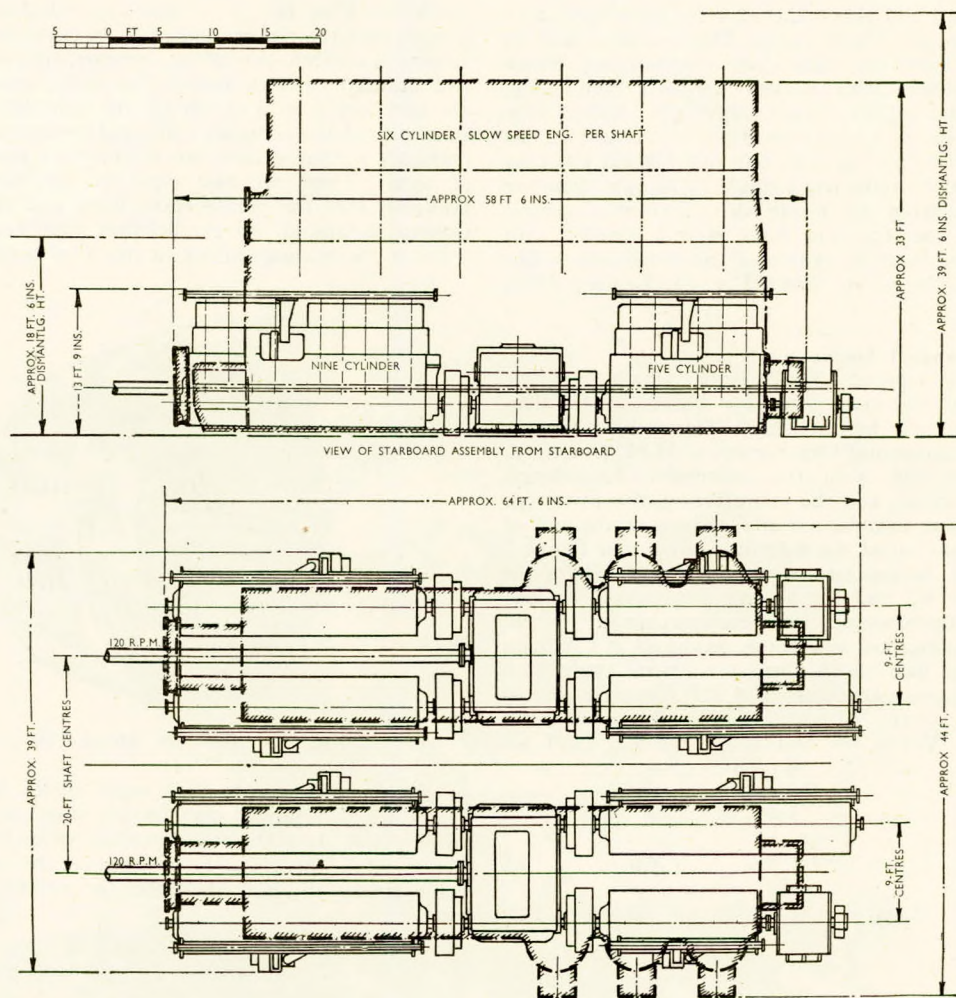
Comparison of overall dimensions for one slow speed engine or a multi-engine installation for each shaft
